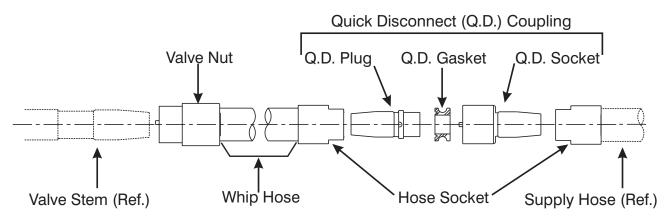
Whip Hose Components and Quick Disconnect Fittings.
